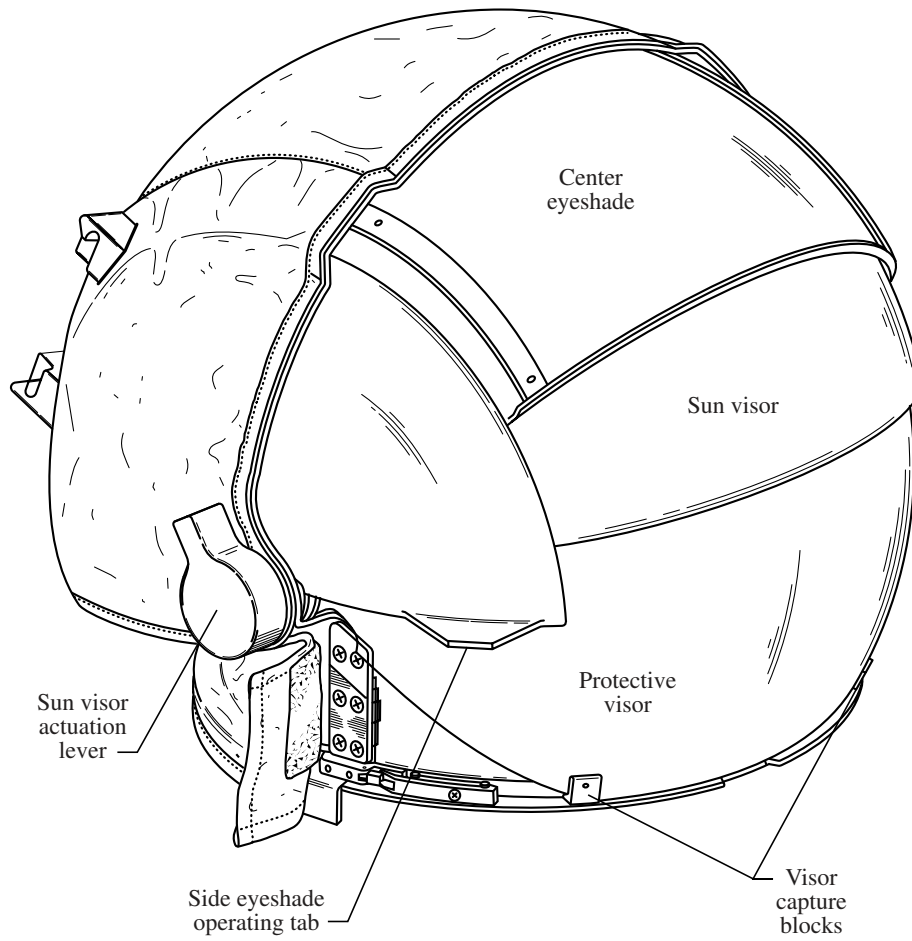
Illustration of helmet extravehicular visor assembly (EVVA) showing placement of visors and eyeshades.
